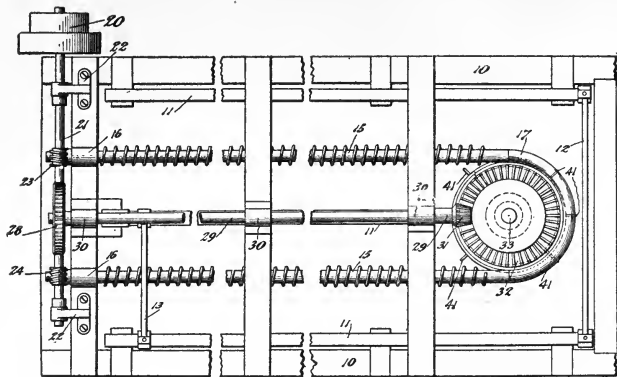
TOP PLAN VIEW OF DANIELS SCREW CONVEYER MACHINE
